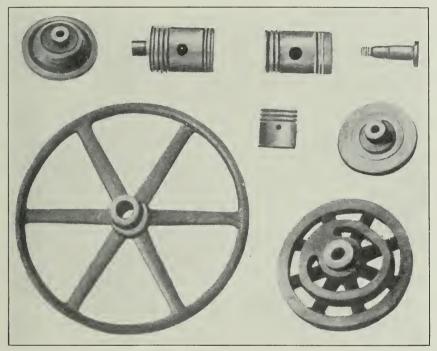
Some of the Work done on the Potter & Johnston Machine
